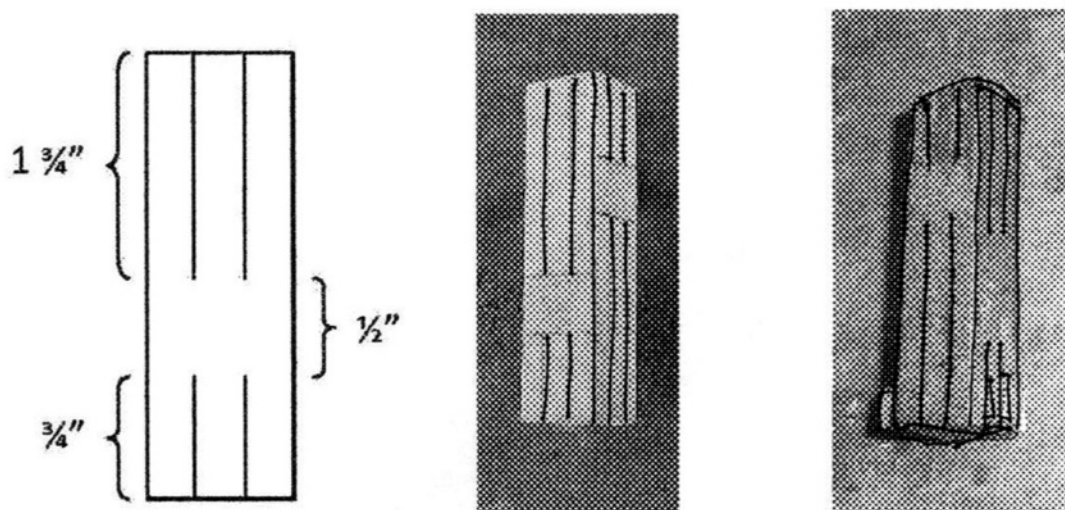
Cut layout (left), blank with marked cuts (center), cut blank with spacers (right)
